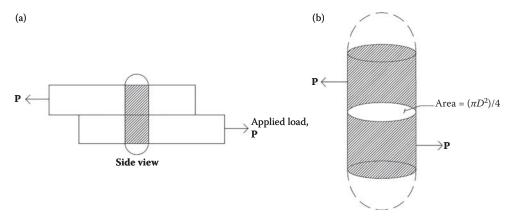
Lap joint showing rivets or bolts penetrating through two plates and connecting them together
